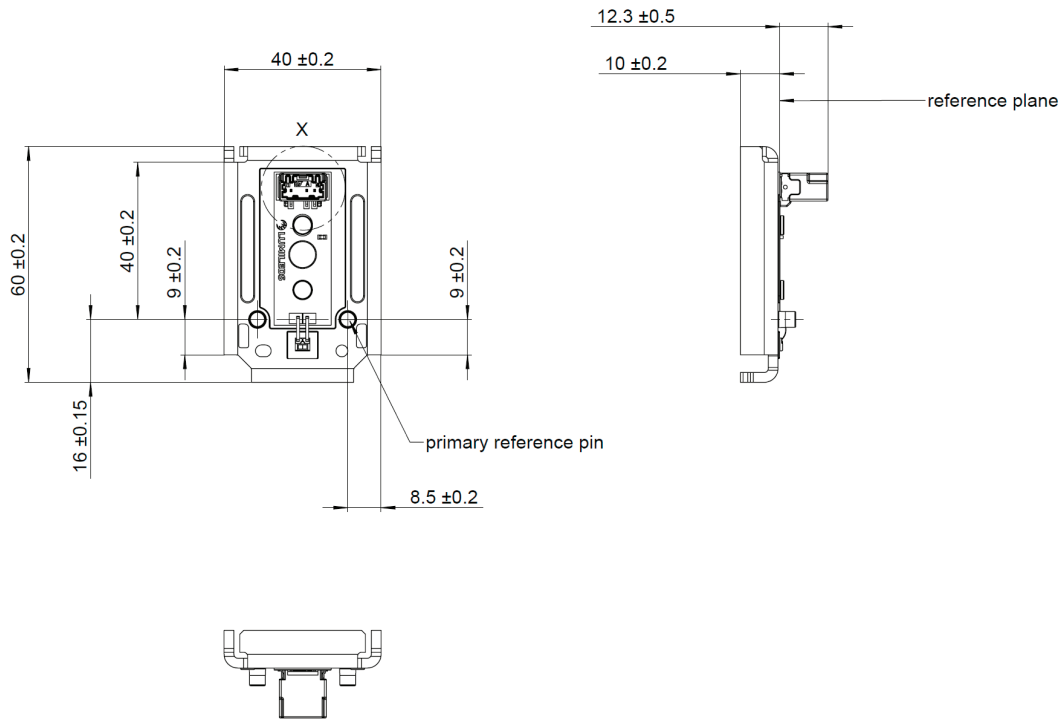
Mechanical dimensions in mm of the LUXEON Go 1x2 slave module with heatsink type A
